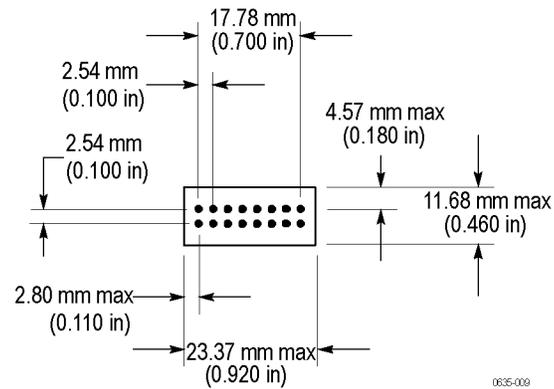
Dimensions of 8-channel probe footprint with probe grouper attached
